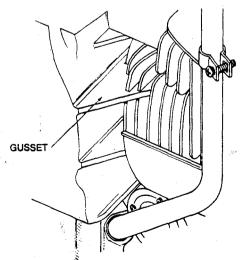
SHEET METAL MODIFICATION FOR ENGINE GUSSET
